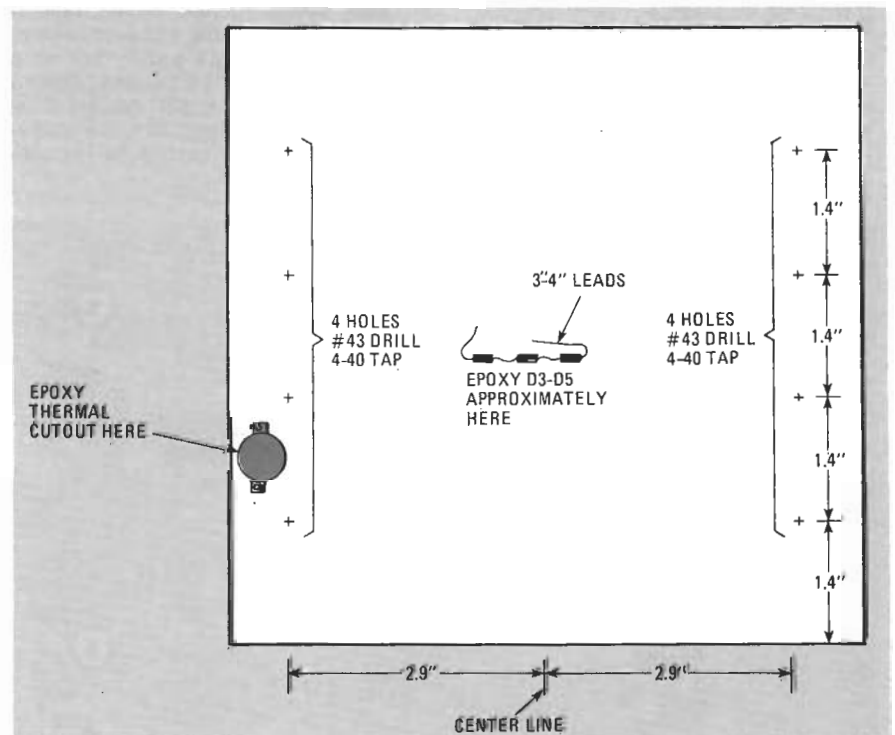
HEAT-SINK DRILLING GUIDE. Note that some parts are fastened with epoxy to the heat sink.
